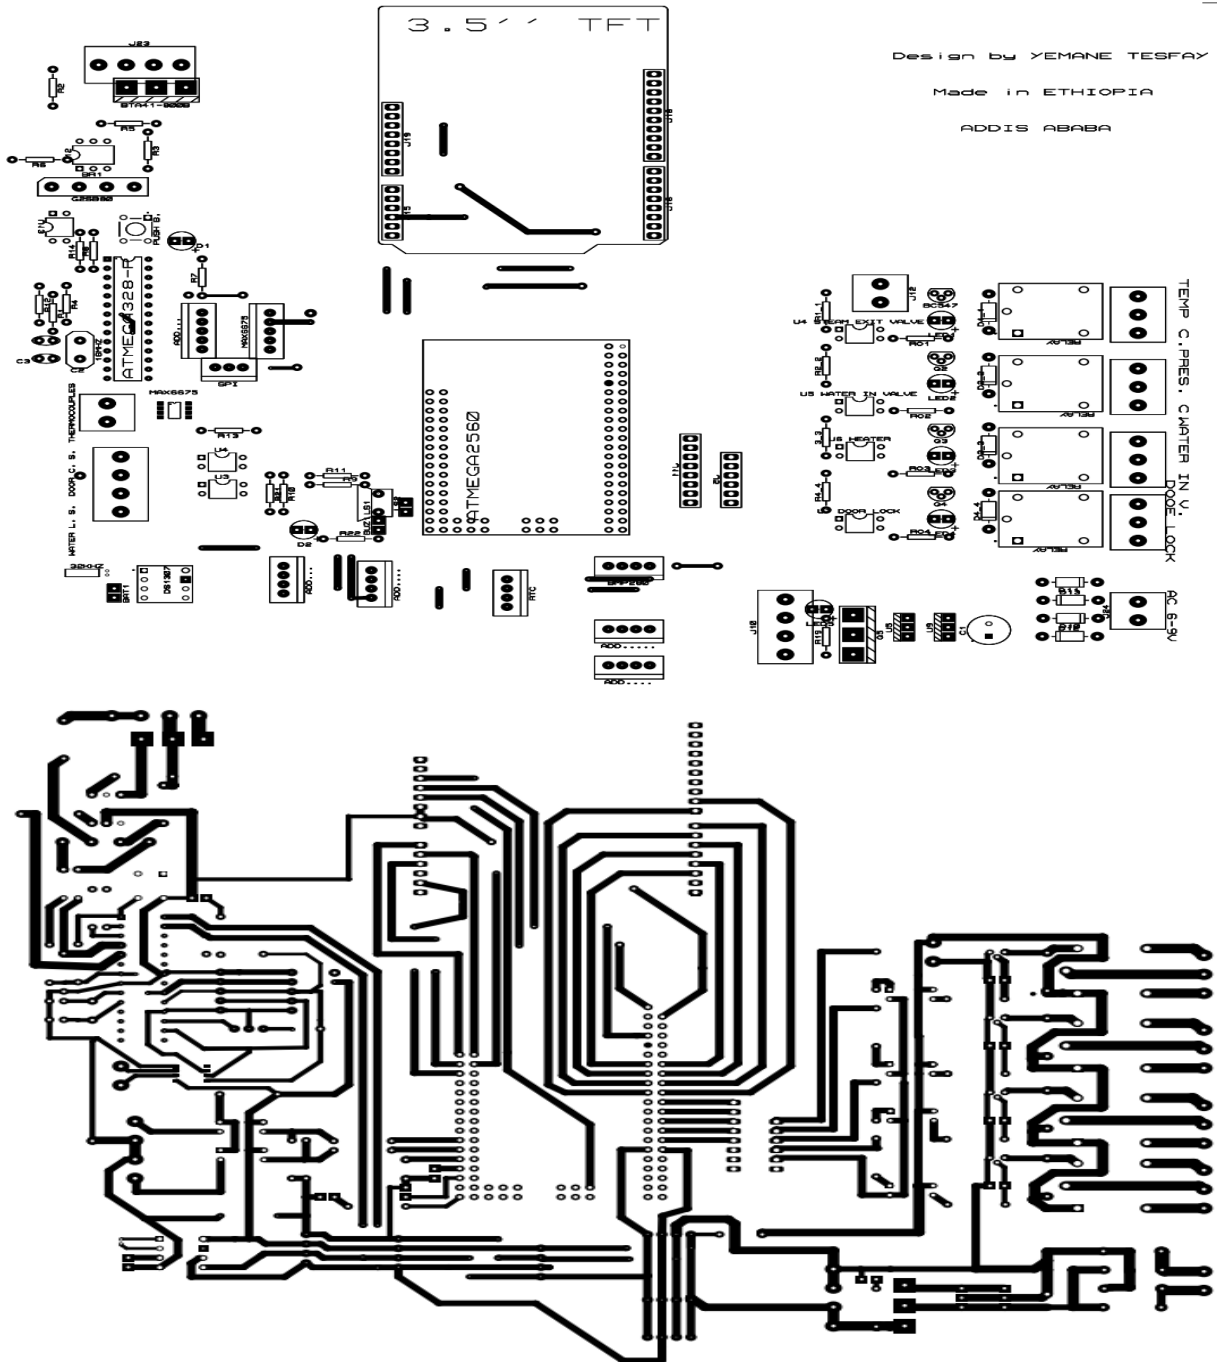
Complete PCB design of the smart steam sterilizer control unit: component side (top) and soldering side (bottom).
